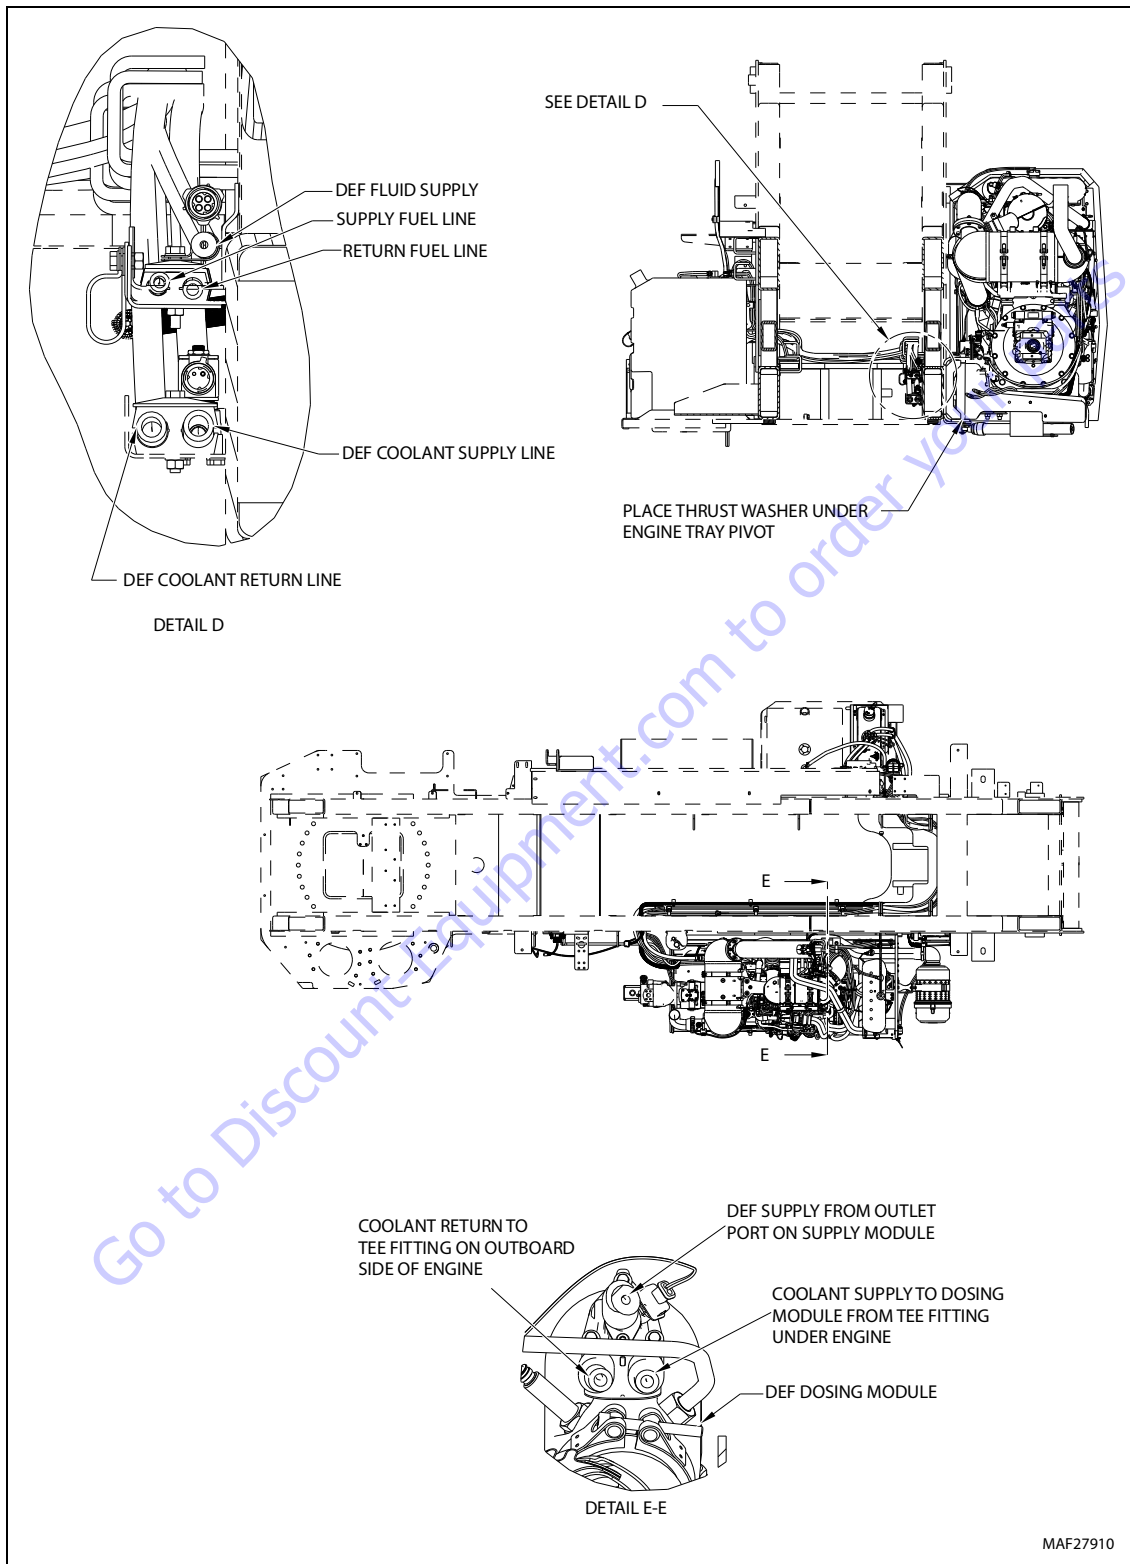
Engine Installation and Diesel Exhaust Fluid (DEF) System (T4F & Stage IV) - Sheet 3 of 6
